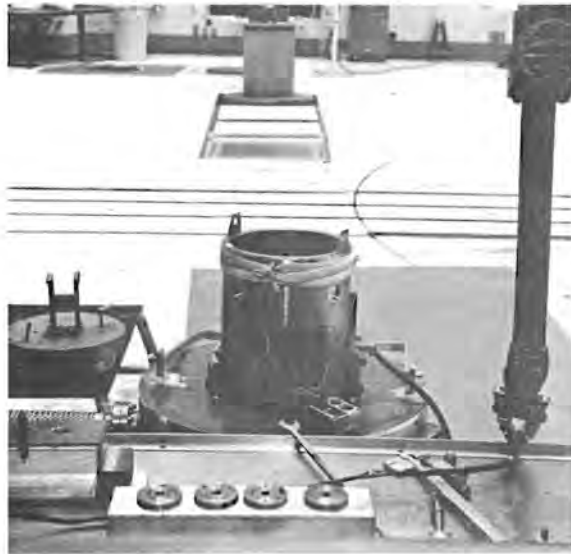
Empty Canister in Weld Pit Ready to Receive Fuel Assembly (Note Heat Tape Near Top of Canister Body)
